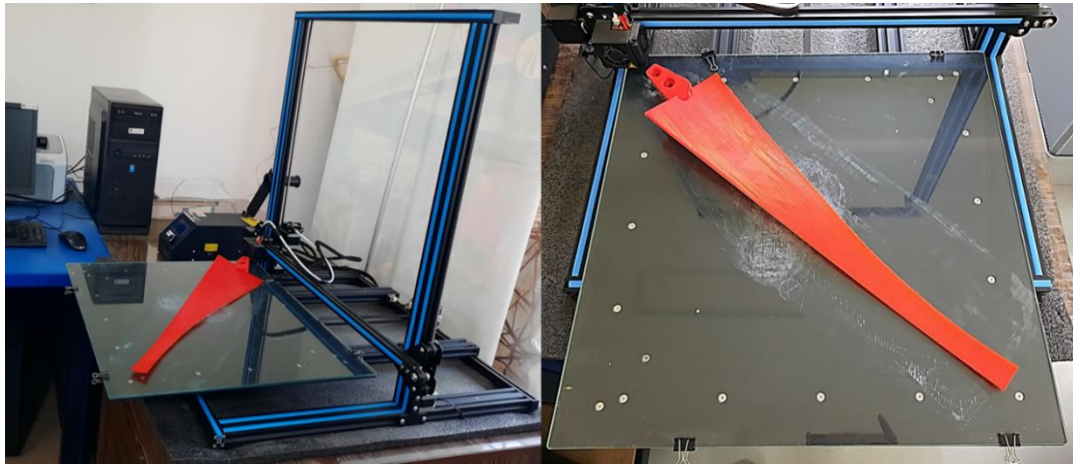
The Inoovo i-fire-XX 3D printer and the printed blade.
